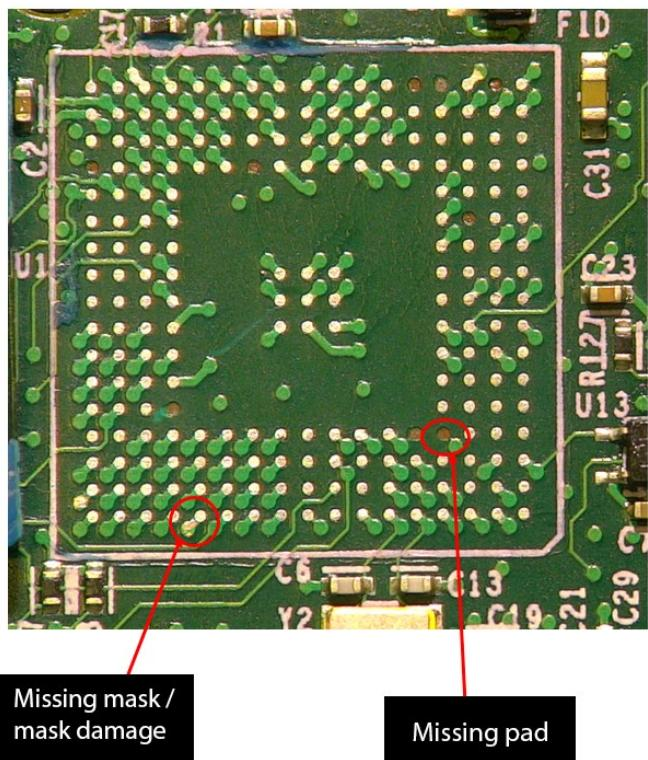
BGA site location after removal of underfilled BGA indicating both pad lifting and mask damage.
